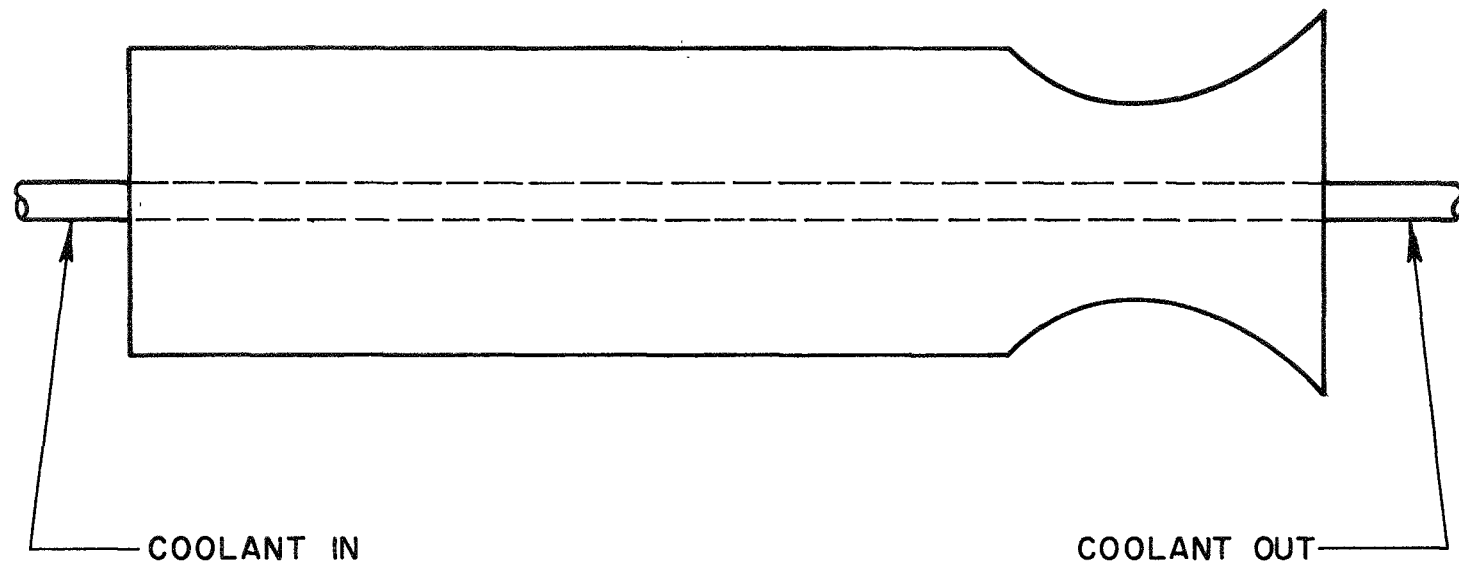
SKETCH OF SINGLE 3/8" O.D. TUBE INSIDE ENGINE.
